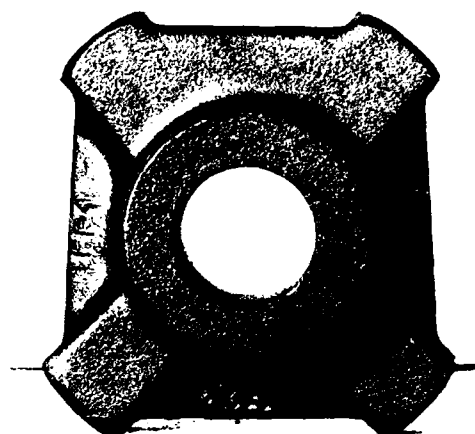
Swivel axle spindle carrier plate hot forged with METASAFE 700.
